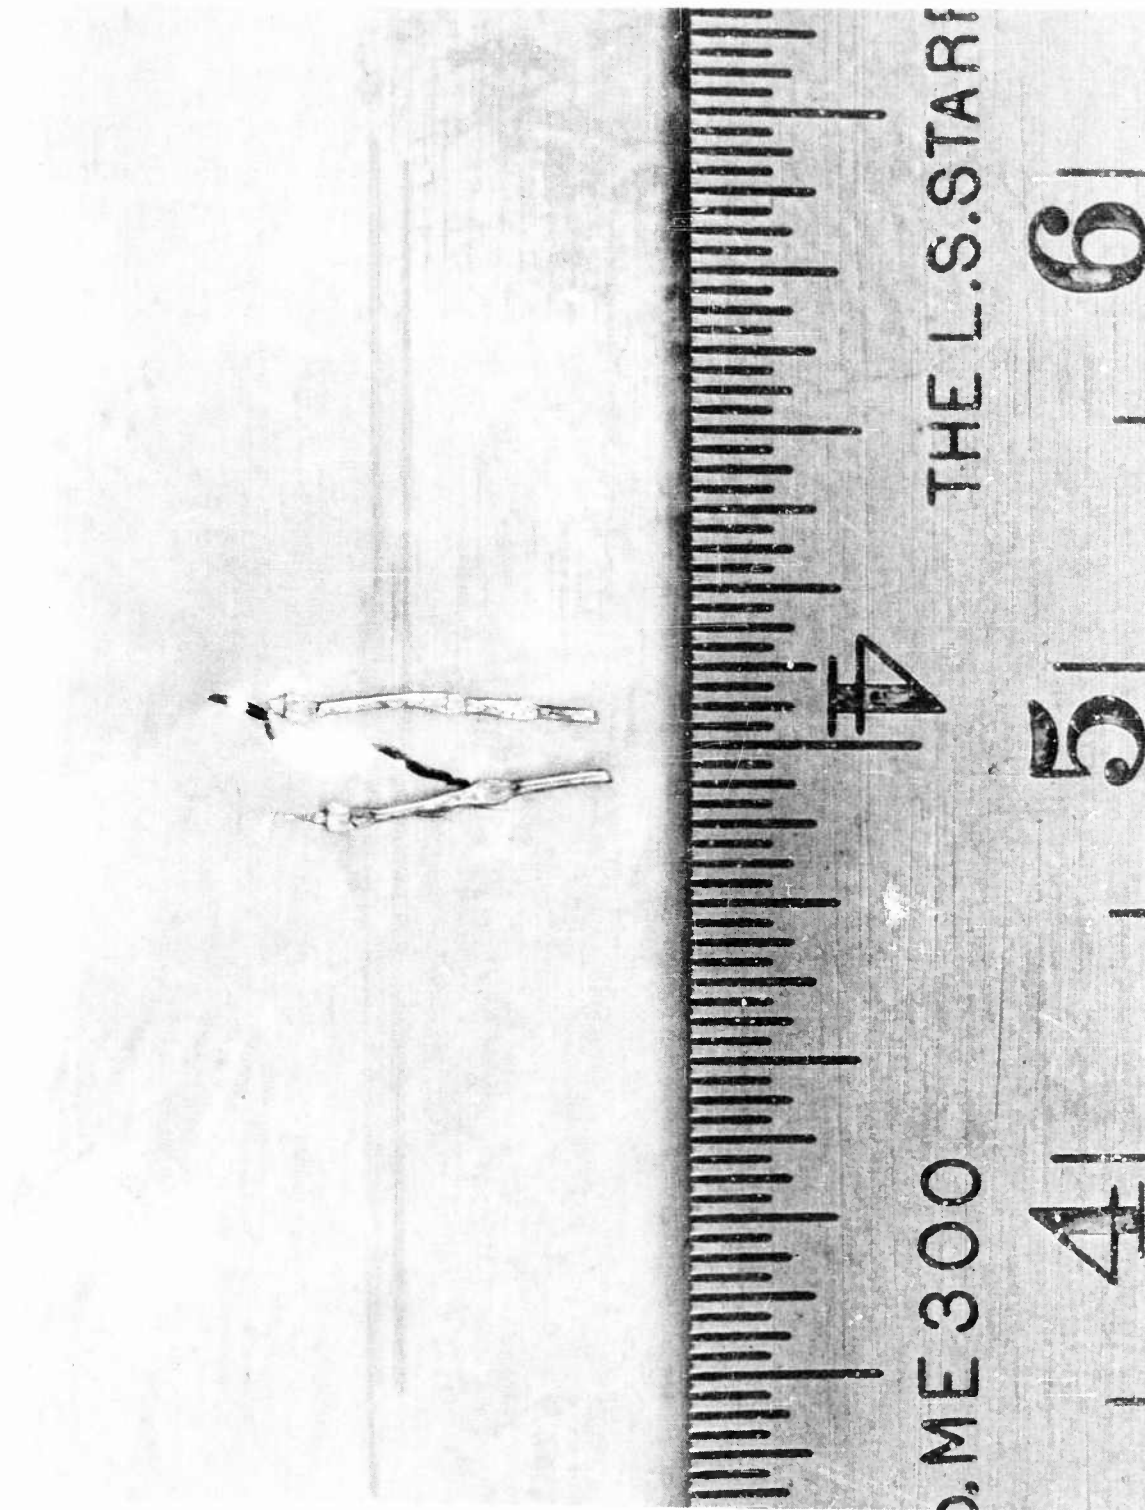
Cracking at a Resistance-Welded Thermocouple After Test
